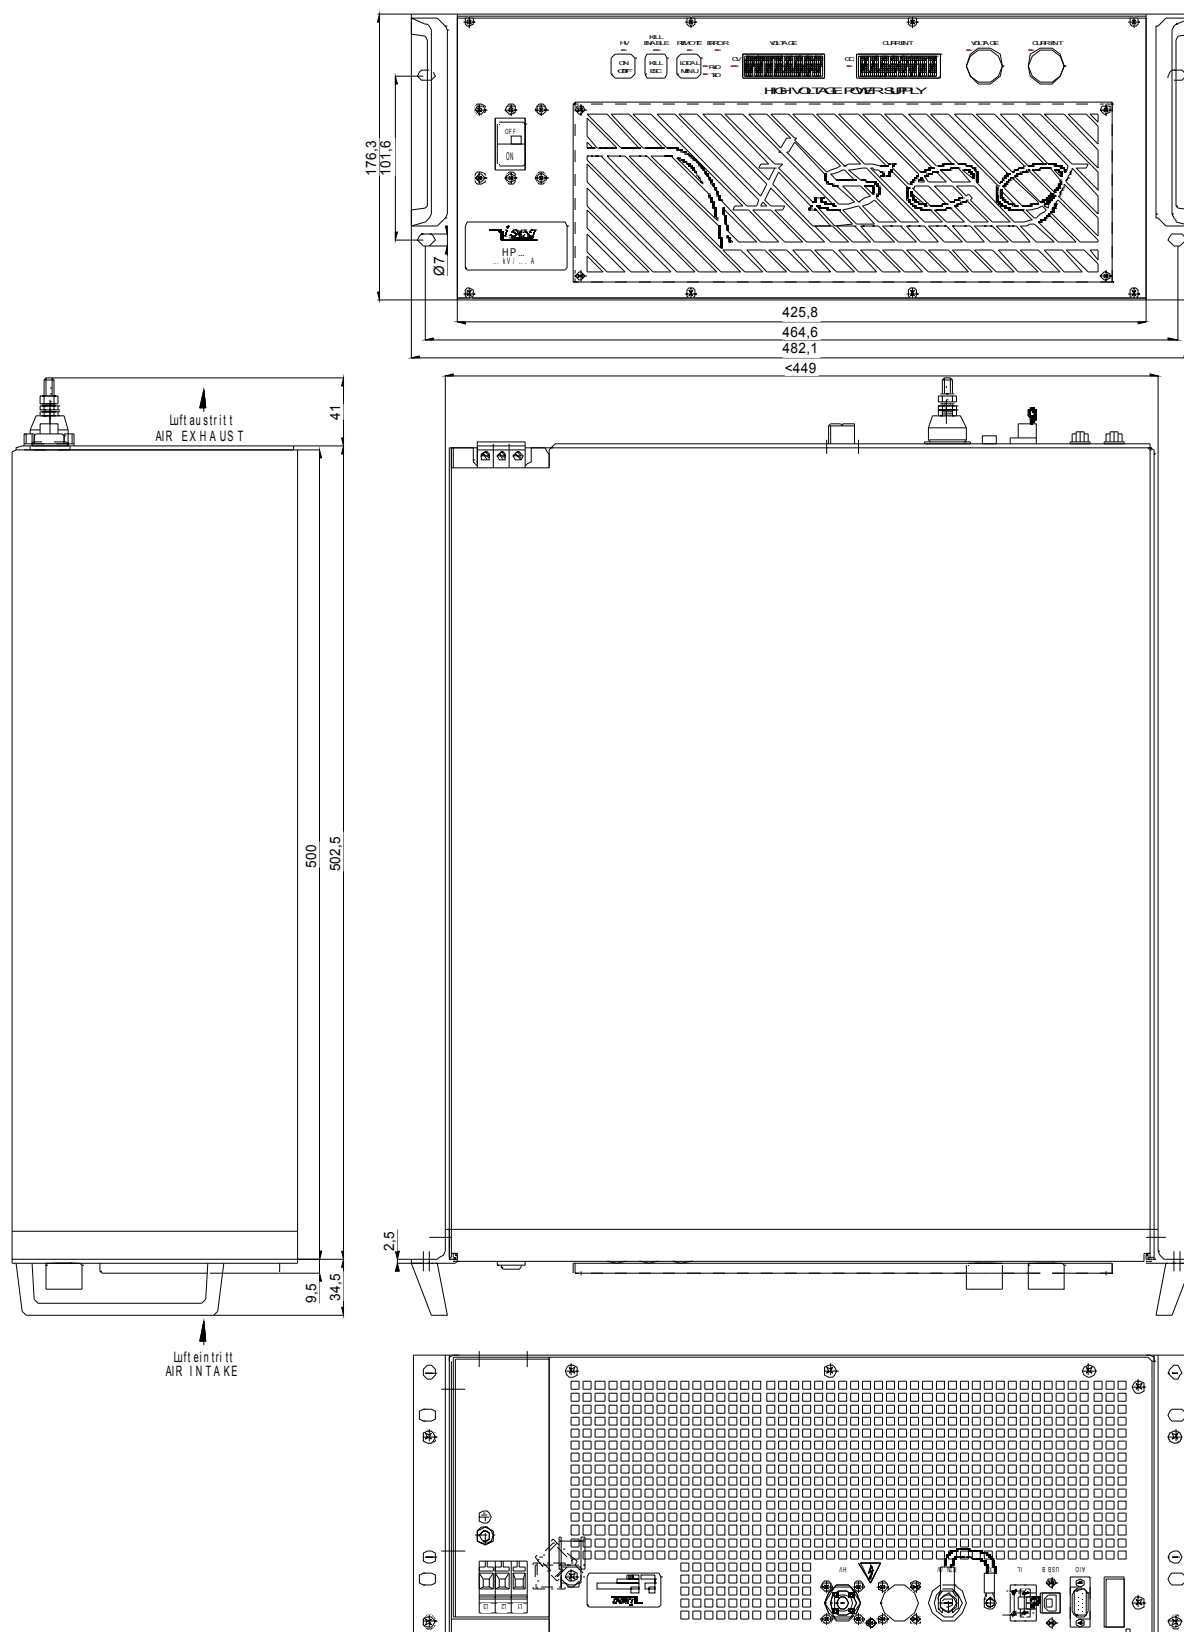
Dimensioned drawing (in mm), standard version of the rear panel
